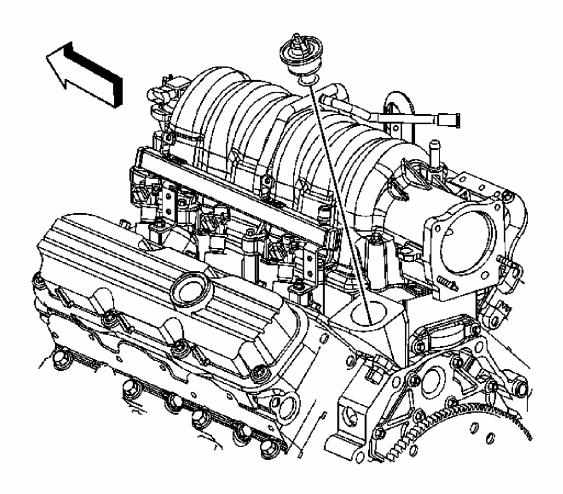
Removing/Installing Thermostat Courtesy of GENERAL MOTORS CORP.
